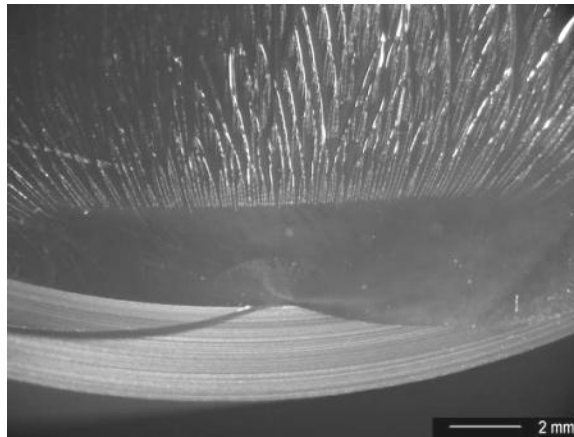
Image showing the fracture surface of GB1-5.
